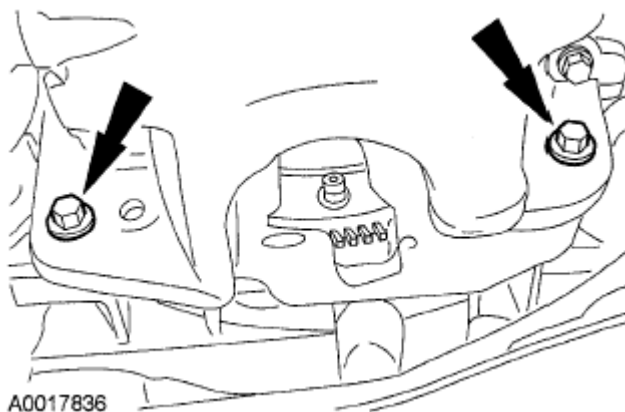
Locating Oil Pan-To-Transaxle Bolts
